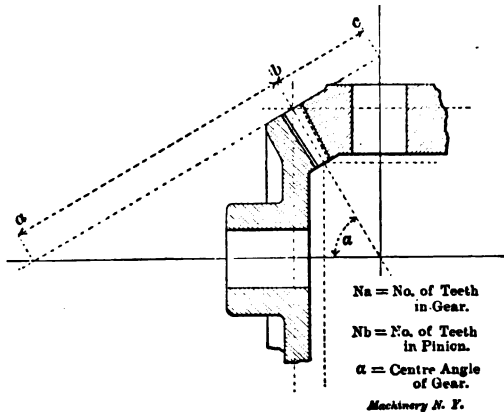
Diagram Showing Method of Selecting Cutters for Bevel Gears.
